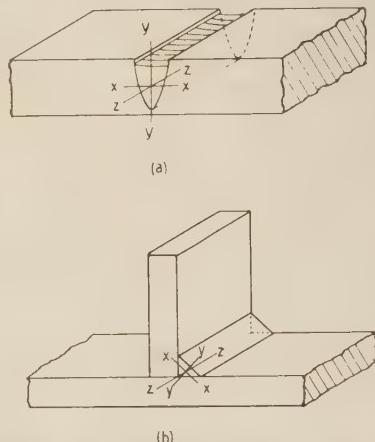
DIRECTIONS OF SHRINKAGE WHEN A WELD COOLS
